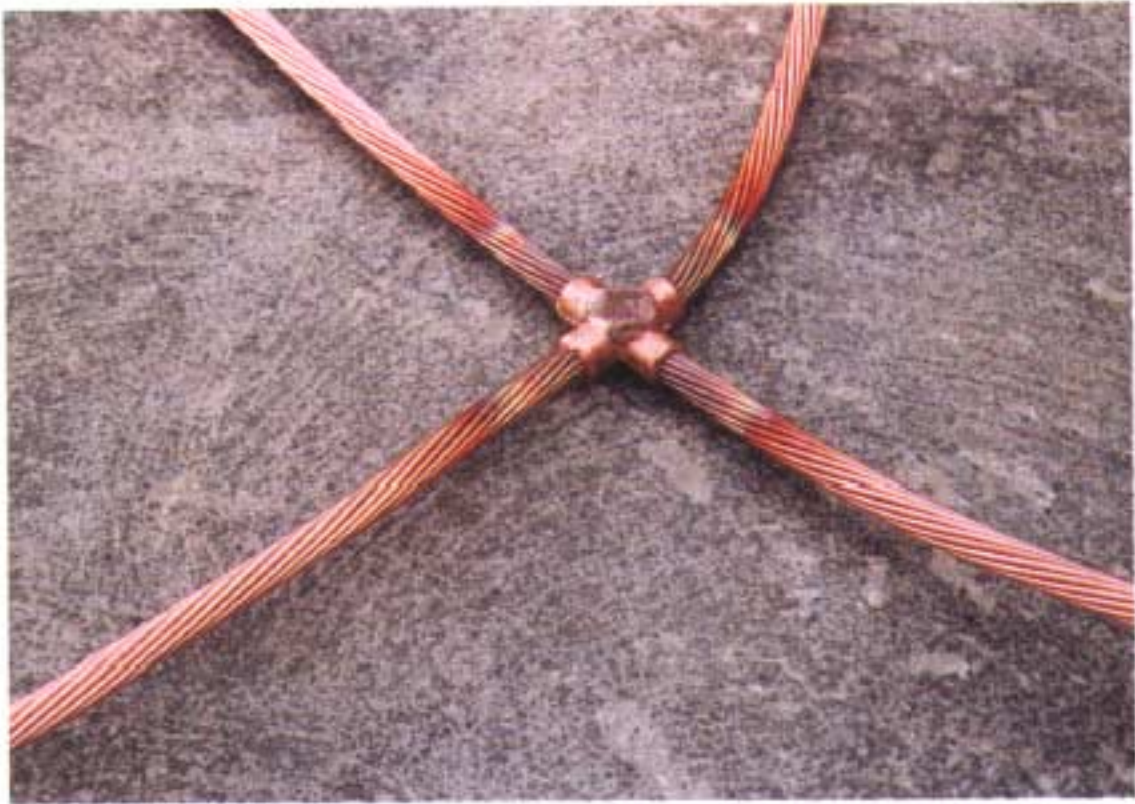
After Test Appearance of Cadweld Welded Connections
